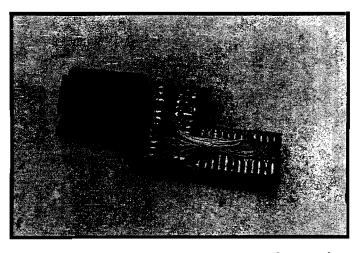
Bottom view of finished module. See text for commentary on wiring.
